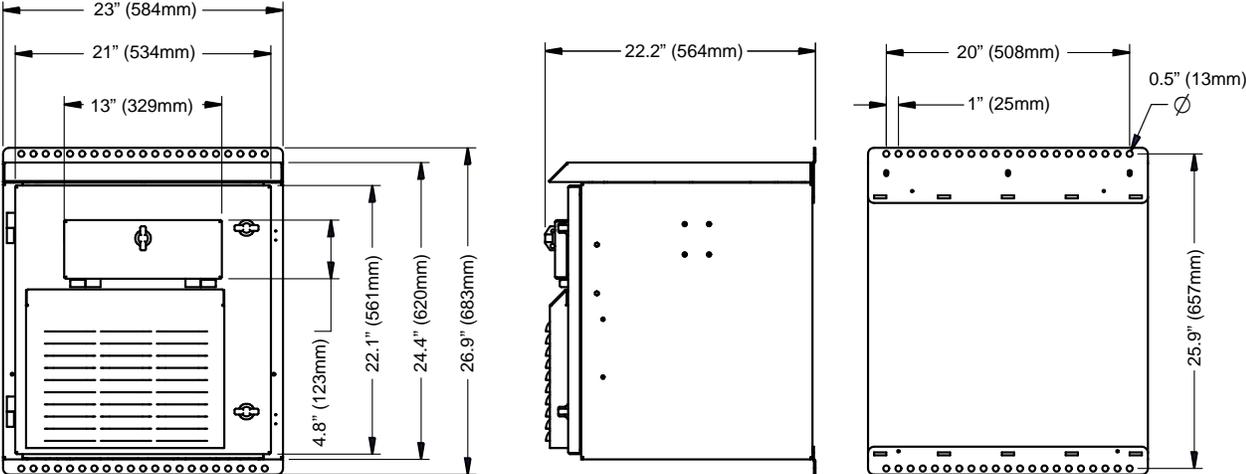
, Enclosure Dimensions (without battery cabinet)
